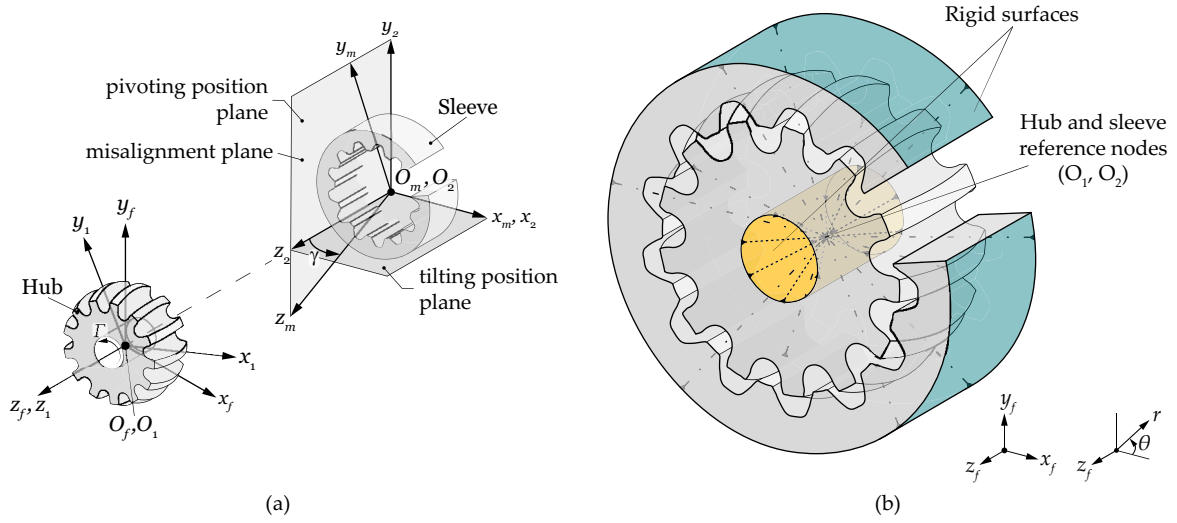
Description of the spherical gear coupling finite element model for the loaded tooth contact analysis: (a) coordinate system for the model assembly, and (b) definition of rigid surfaces and reference nodes.
